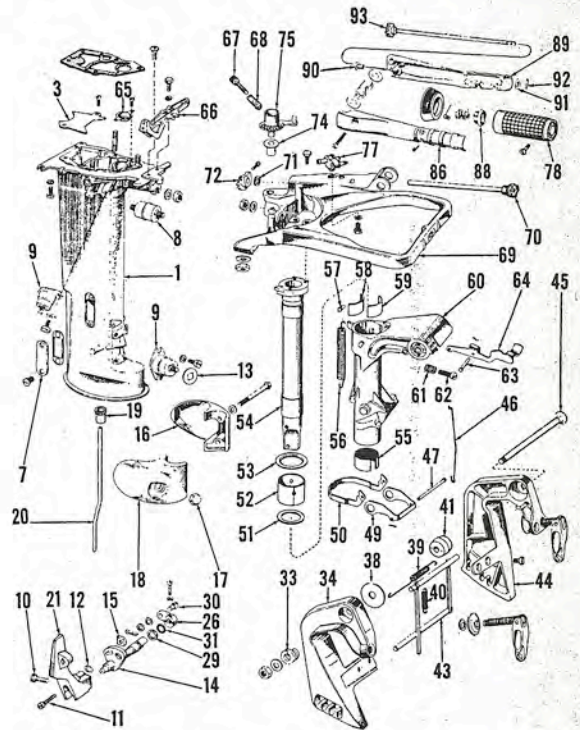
Exploded view of late series QD stern bracket, drive shaft housing and associated parts. Late FD motors are similar. Refer to Fig. J29 for legend except for the following.
